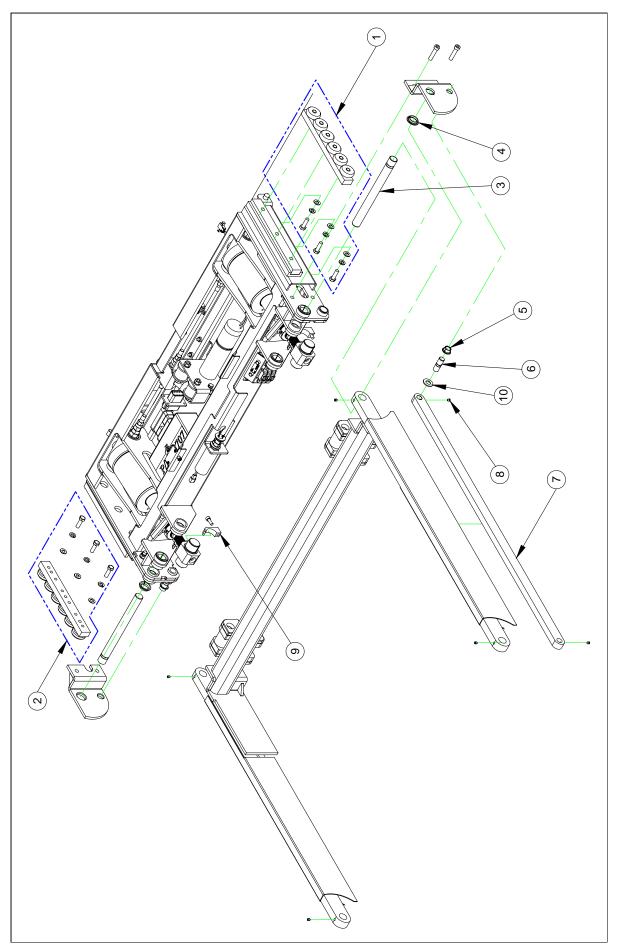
TRAVELING FRAME ASSEMBLY
